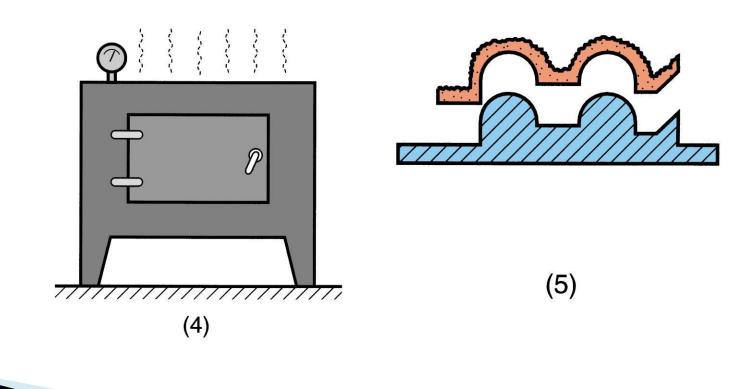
Steps in shell-molding: (4) sand shell is heated in oven for several minutes to complete curing; (5) shell mold is stripped from the pattern;
